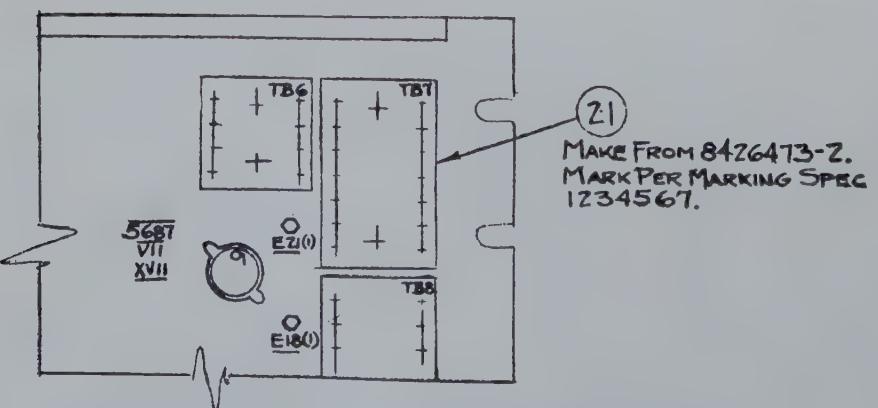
Partial view of a chassis-mounted terminal board using marking specification technique and preserving unique part identification of the terminal board.
